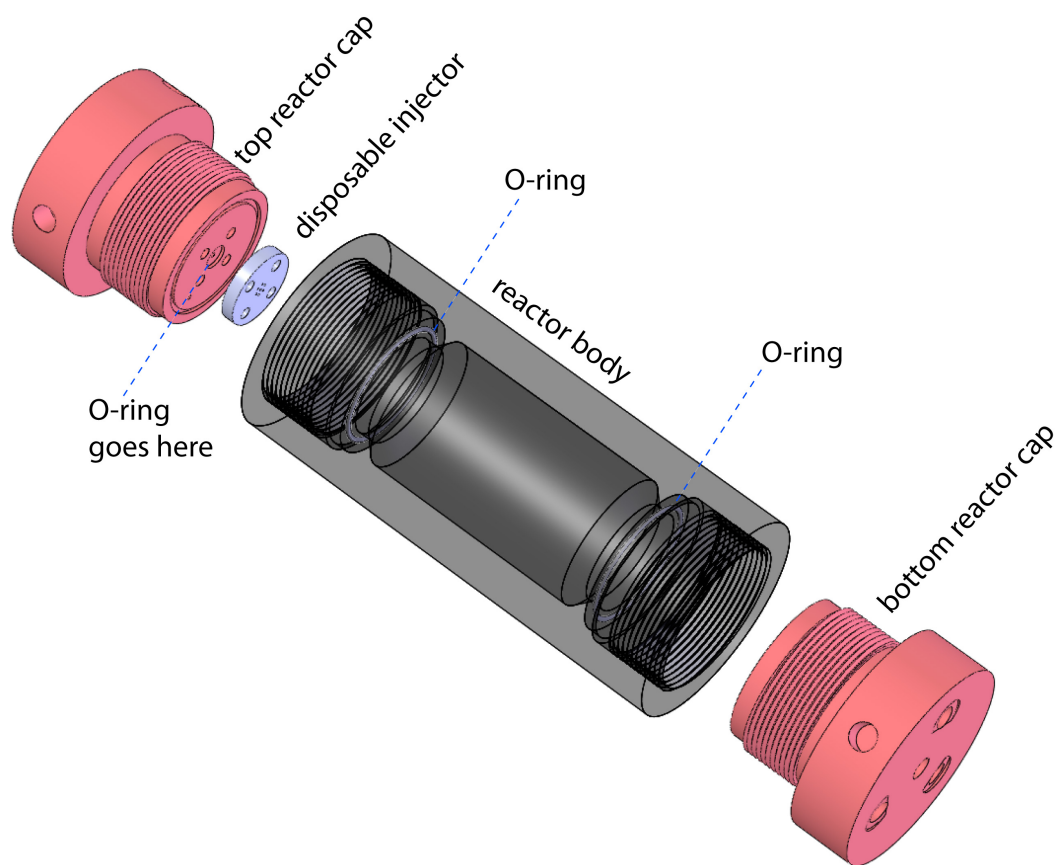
Technical drawing showing the connection/assembly of the reactor components. All components are made of polysulfone except for two O-rings. See the figures above for the specific details.
